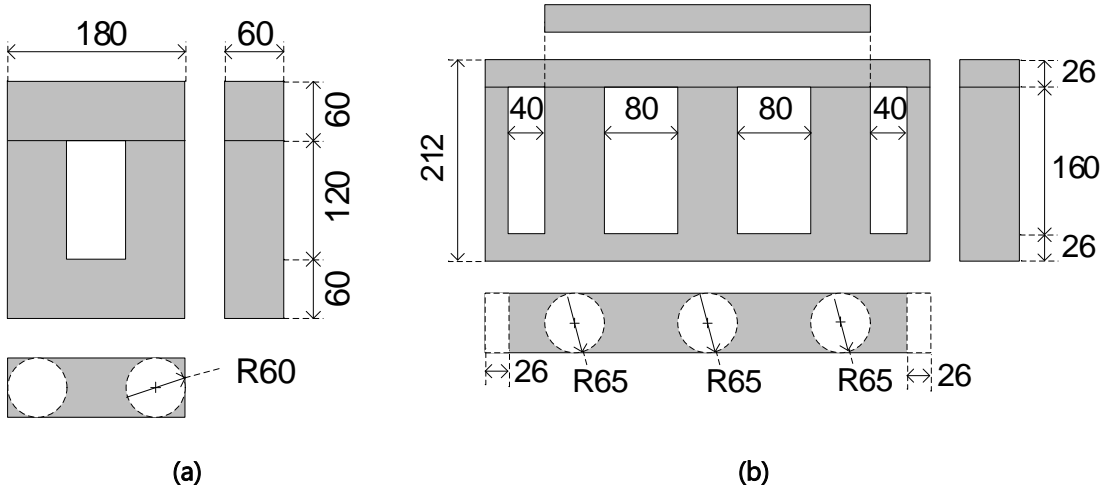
Dimensions of cores for each prototype. (a) Single-phase magnetic core. (b) Three-phase magnetic core.
